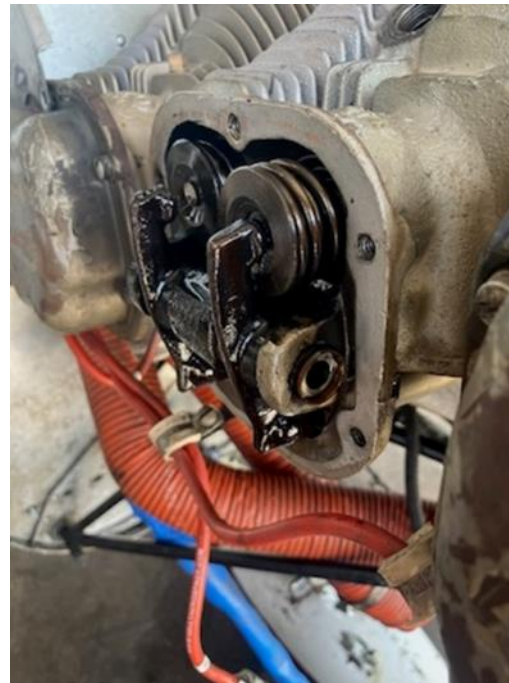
Exhaust valve stuck open. A lot of carbon buildup on the rockers.
